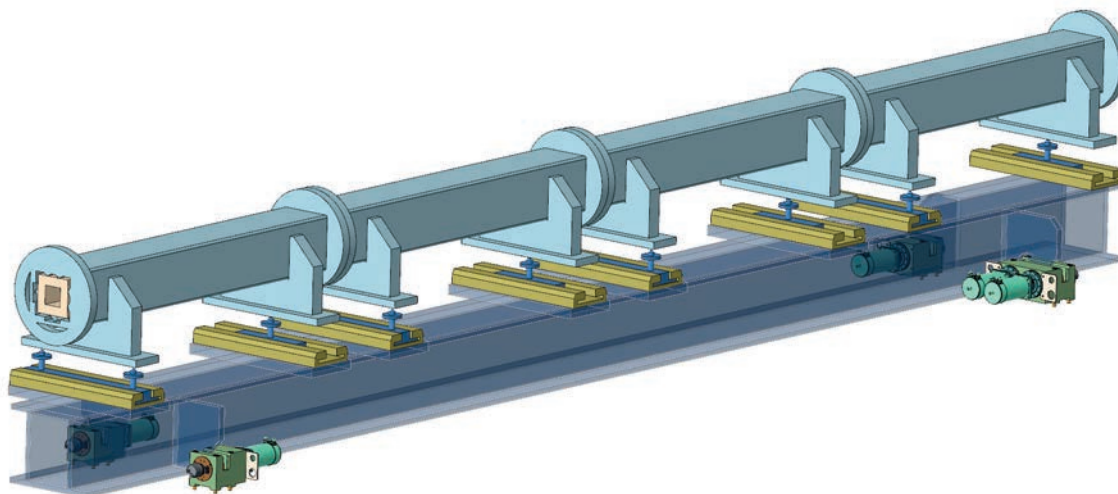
Focusing mirror assembly on remotely actuated precision movers.
